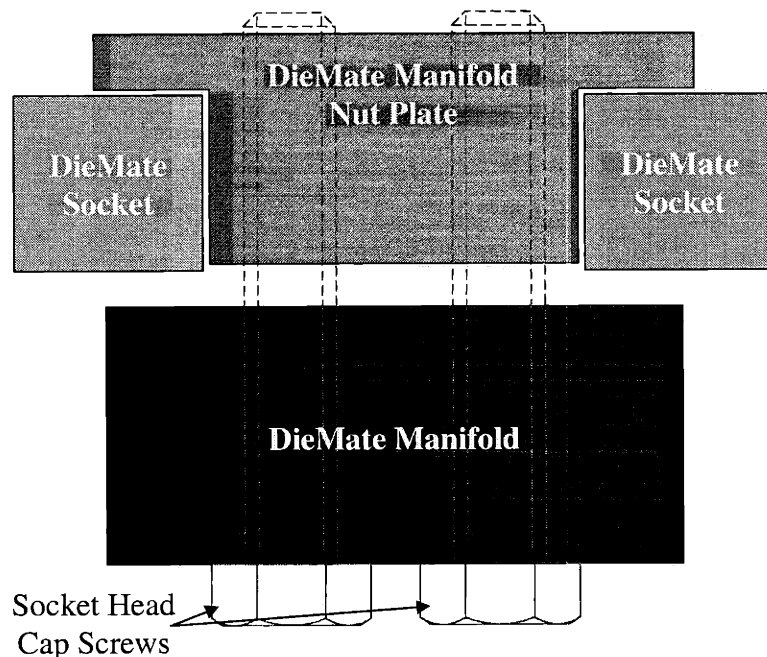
Cross-section showing how the DieMate™ manifold is held in the DieMate™ socket. Note that the DieMate™ manifold nut plate is tapped for the socket head cap screws, but the DieMate™ manifold is not.
